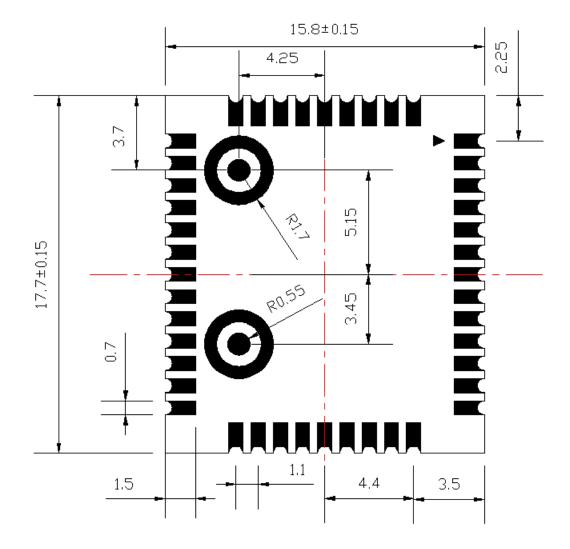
M66 R2.0 Module Bottom Dimensions (Unit: mm)
